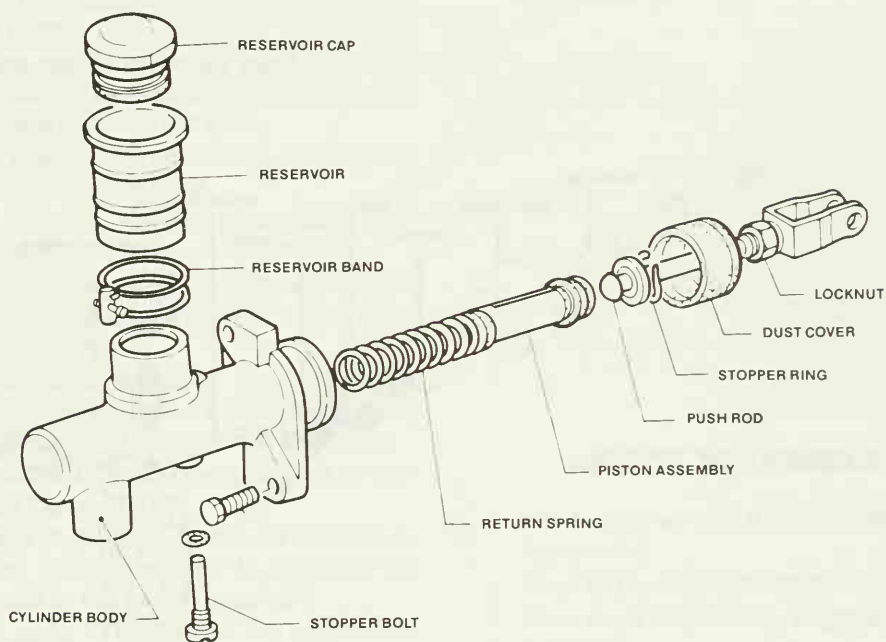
Exploded view of a clutch pedal cylinder. (Nissan Motor Corporation in USA)
